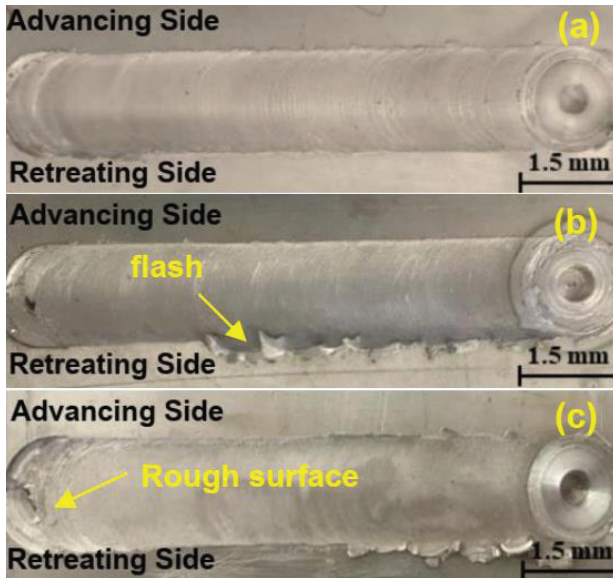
Characteristics of welding from top view surface using a triangular tool pin at rotation speed 2000 rpm and welding speed: (a) 80, (b) 112 and (c) 160 mm/min
